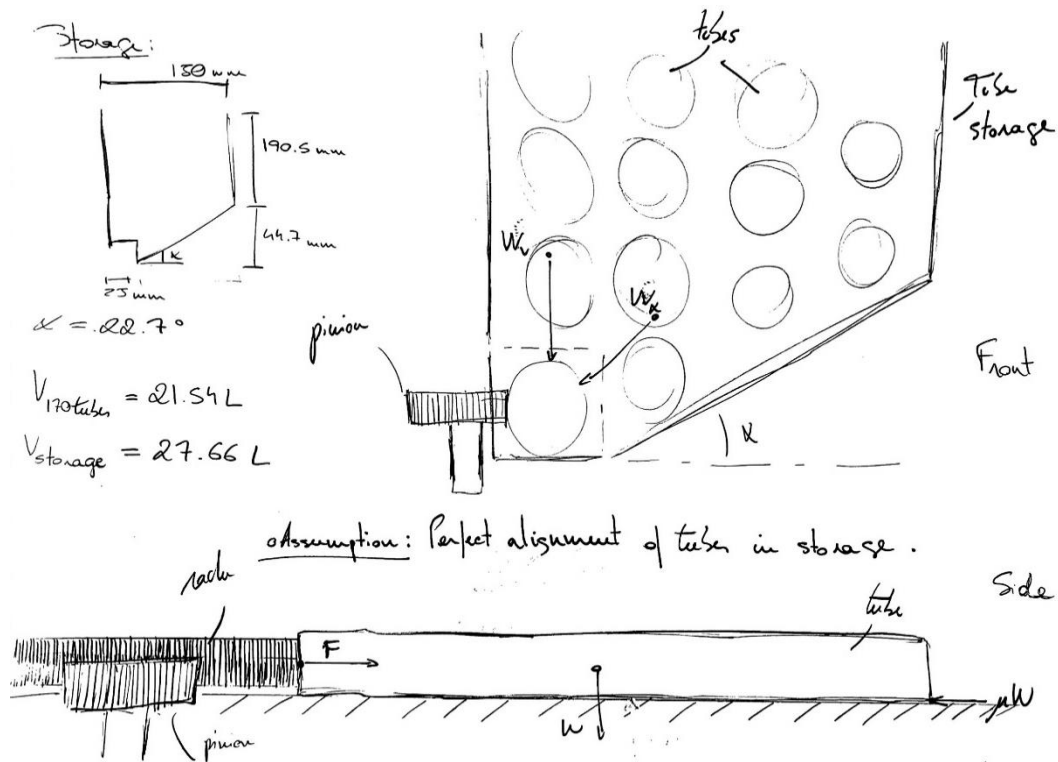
Diagram of Tube, tube storage and tube inserter actuator
